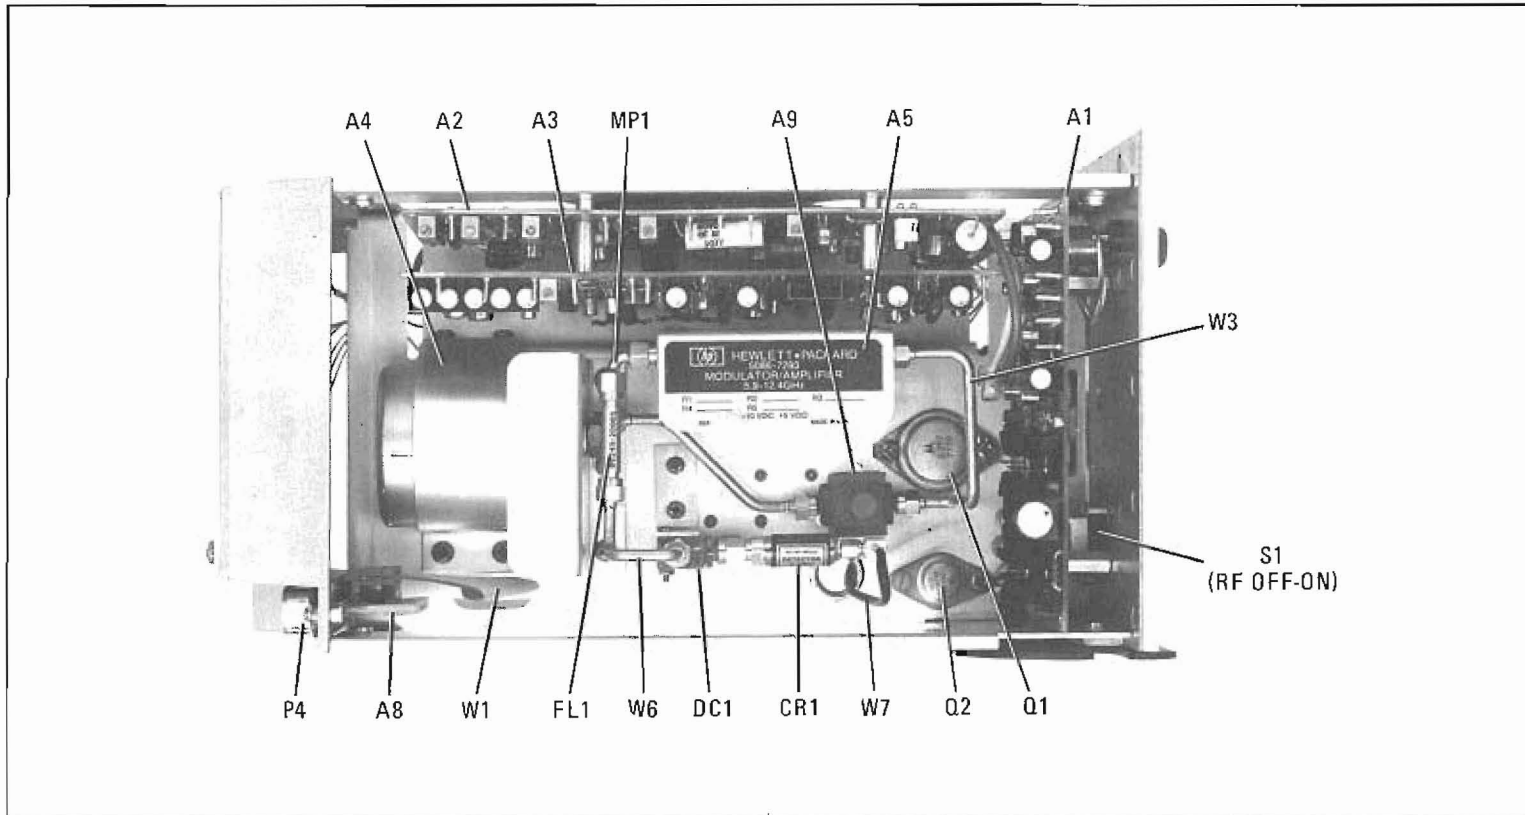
Major Assembly and Component Locations, Top View, 86245A (Option 001)
